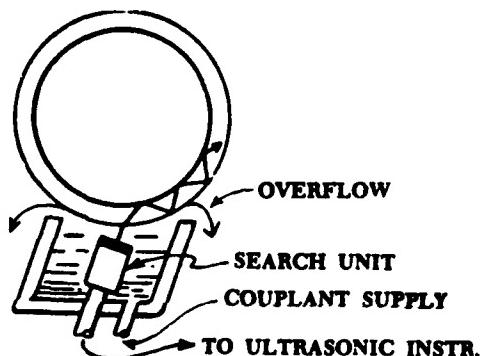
BUBBLER ANGLE-BEAM TESTING FOR PIPE INSPECTION
